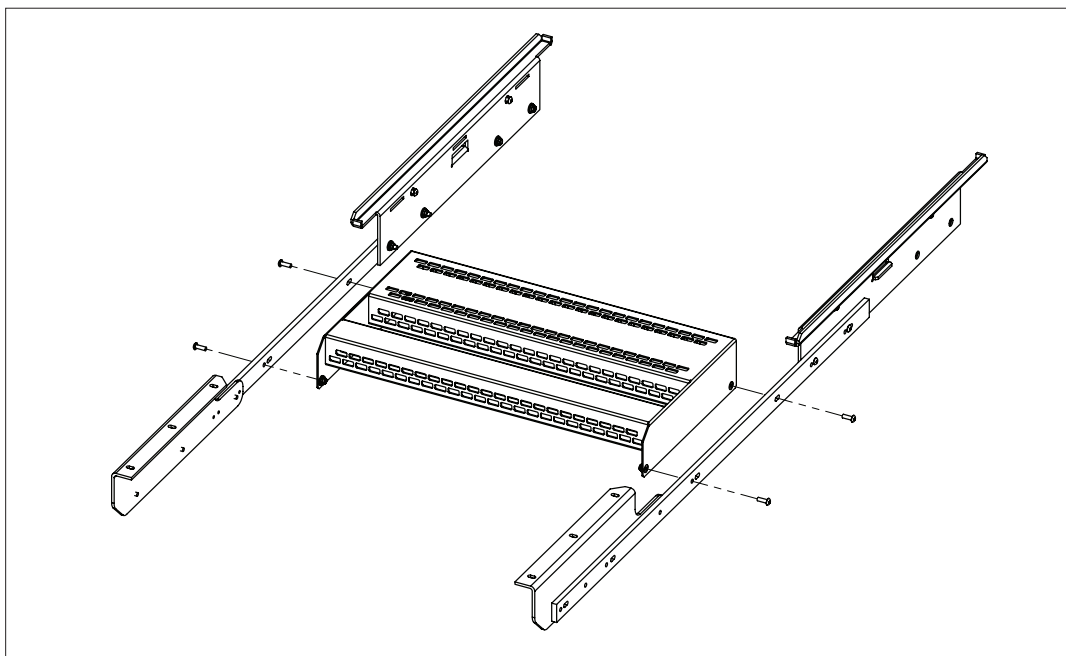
Figure A. The angled side of the cable tray should face the receiver, and with shorter slide kits the cable tray will sit below the lip of the instrument brackets.
